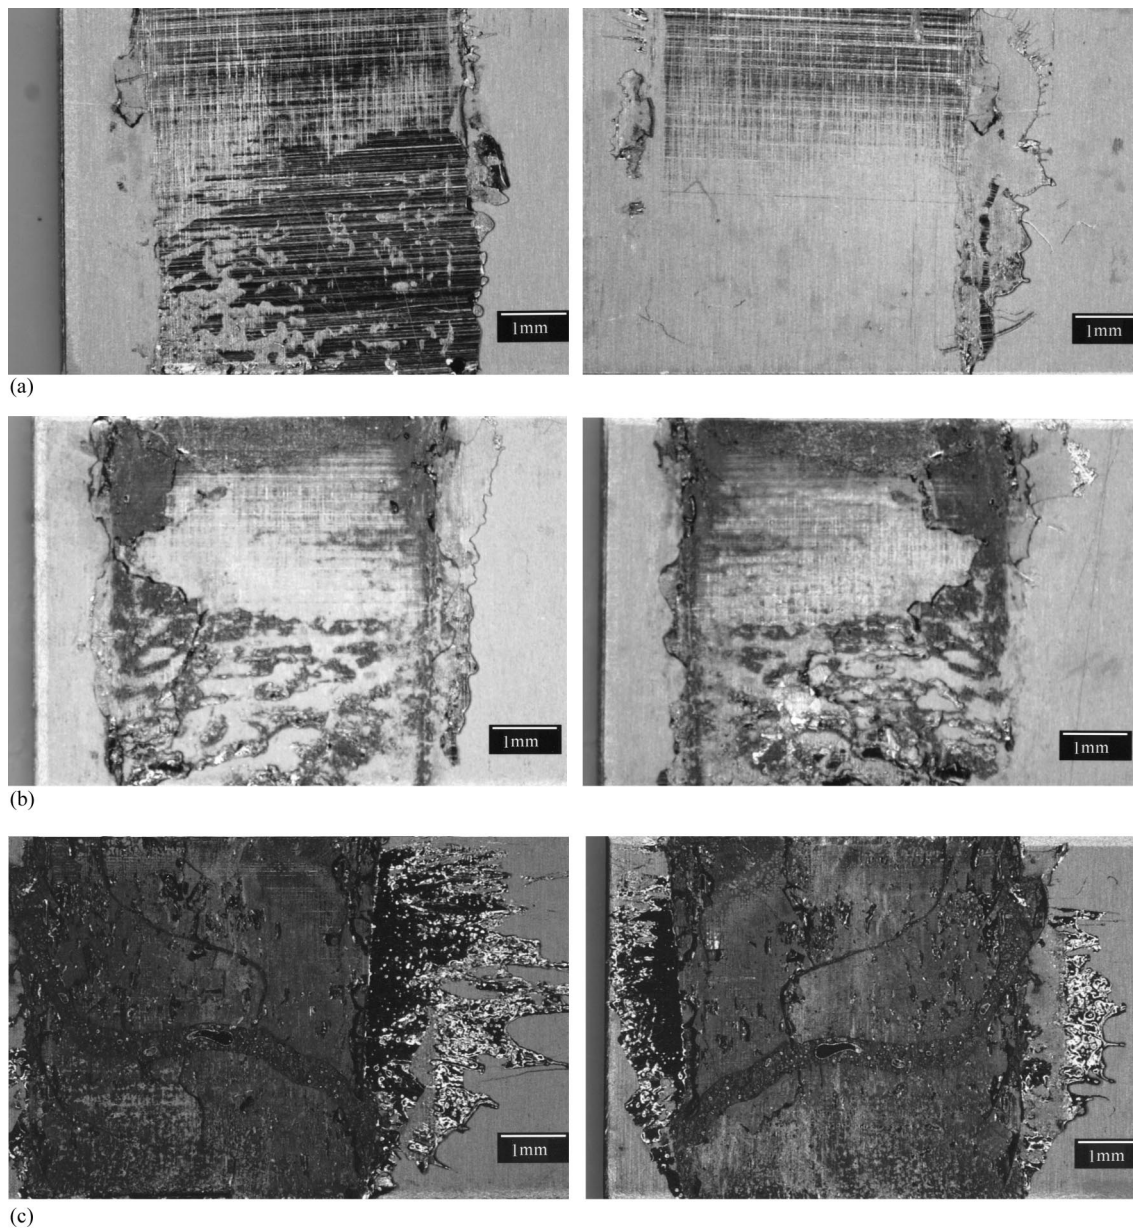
Fracture surfaces of the stainless-steel joints obtained by optical stereomicroscopy. (a) A joint was formed with a  $23\ \mu\text{m}$  foil and shows little wetting of the Au-coated stainless-steel specimens. (b) A joint was formed with a  $35\ \mu\text{m}$  foil and shows partial wetting of the Au-coated stainless-steel specimens. (c) A joint was formed with a  $79\ \mu\text{m}$  foil and shows full wetting of the Au-coated stainless-steel specimens.
